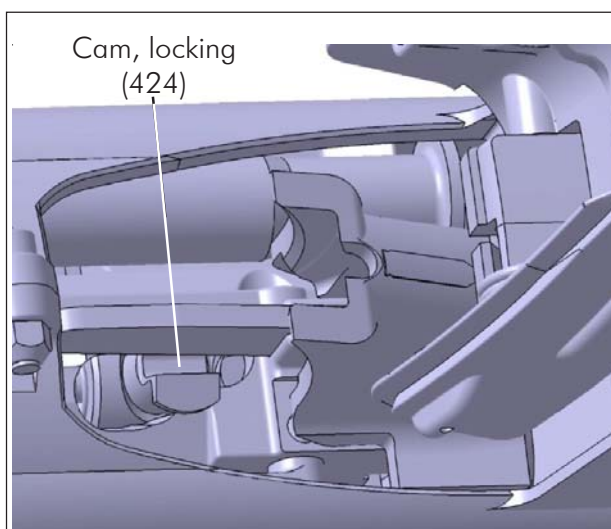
e - The bolt assembly (450) is not completely locked
